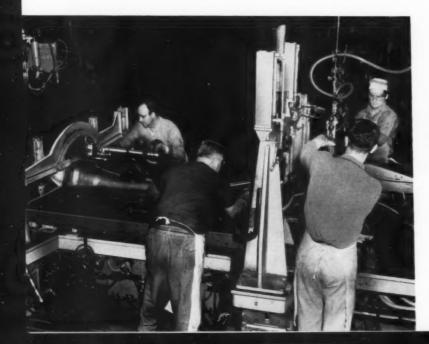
Five-ton welding fixture is used to position and join the three main floor-pan stampings. The stationary halves of the two cross-clamps (beneath the pan) serve as the lower electrodes.
